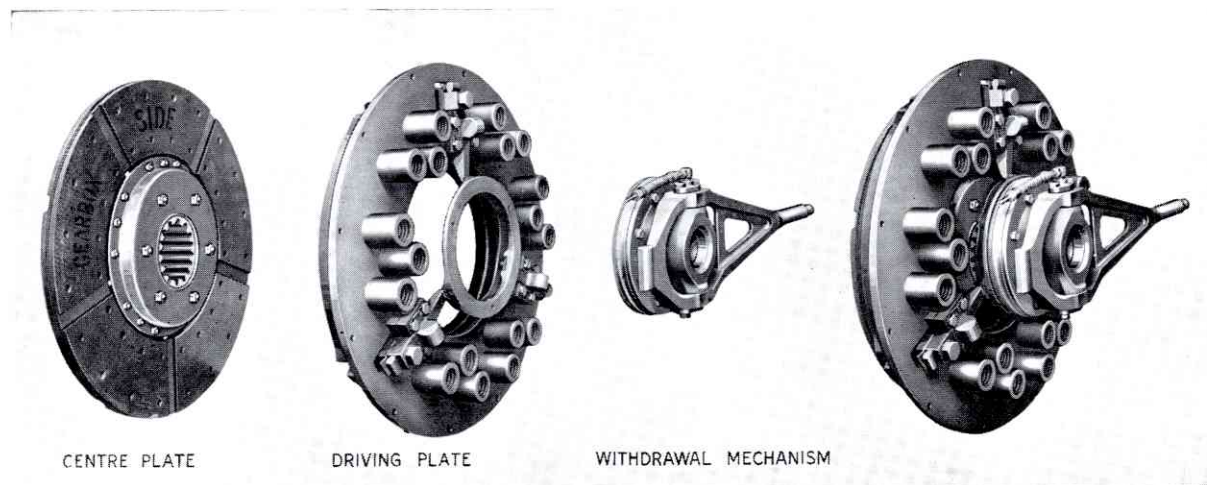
CLUTCH SUB-UNITS VIEWED FROM GEARBOX SIDE
